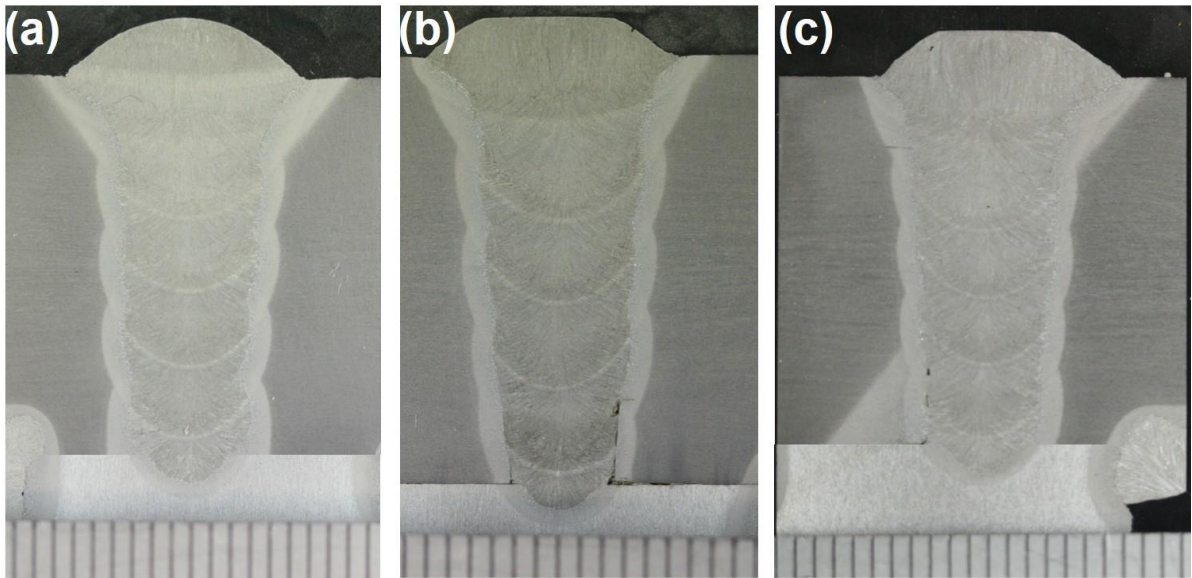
Macrographs of weld deposited layers of API 5L X100 pipeline steel (a) as-welded (b) post weld cold rolled (c) post weld cold rolled followed by laser processing
